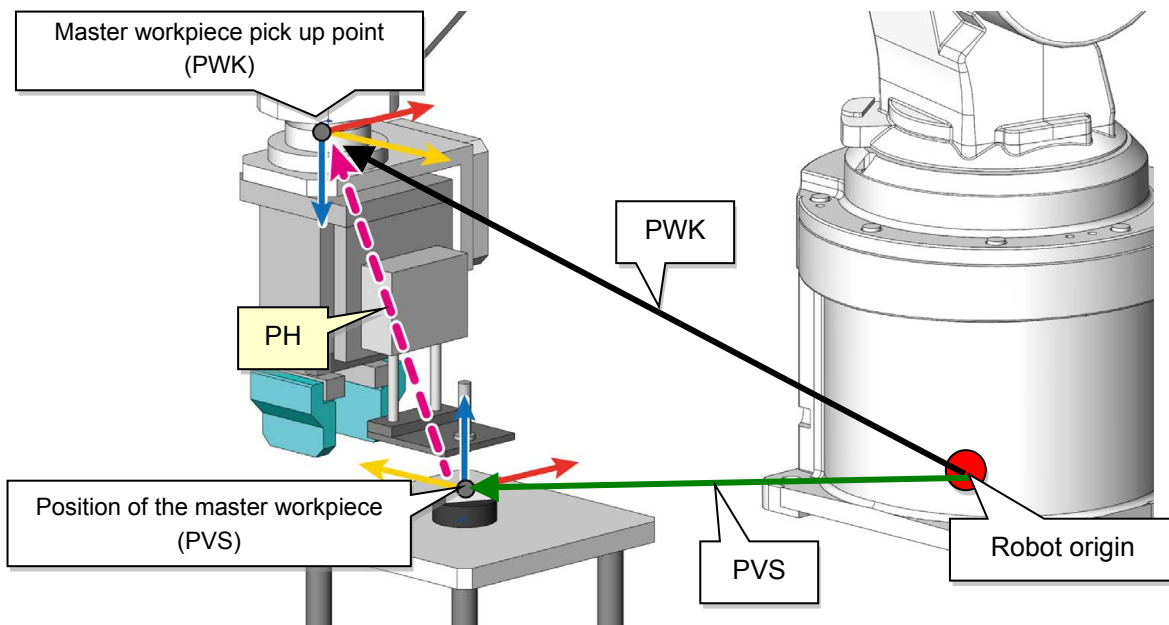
Master workpiece pick up point (PWK) and master workpiece
